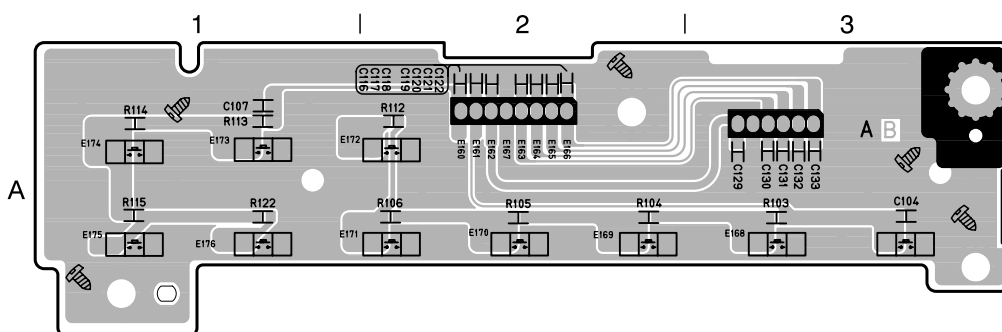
EU03B Front (L) PC Broad (Bottom side)
